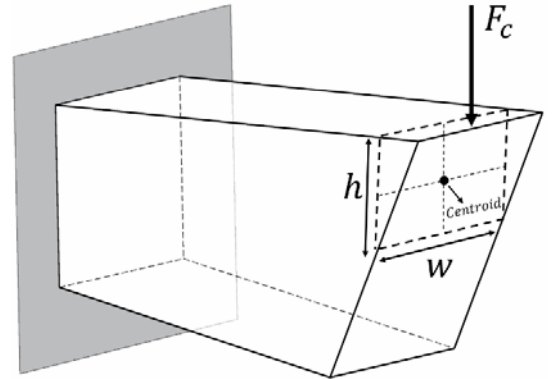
The cutting tool modelled as a cantilever beam and a local cross section with certain width and height
